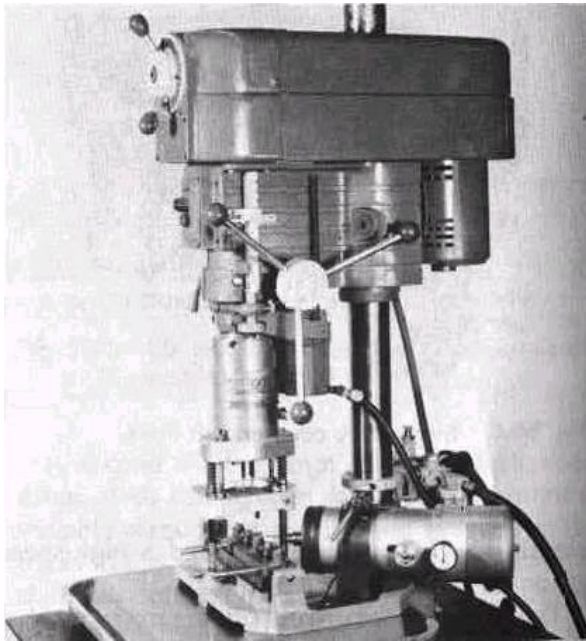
Multiple-spindle drill head mounted on single-spindle drill press.
